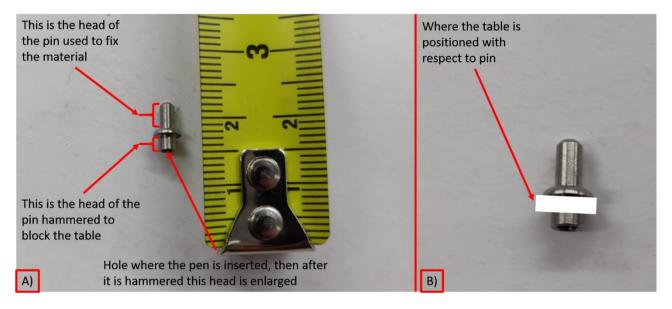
A) it is shown the description of each pin parts. B) it is reported how the pin is inserted inside a table hole.
